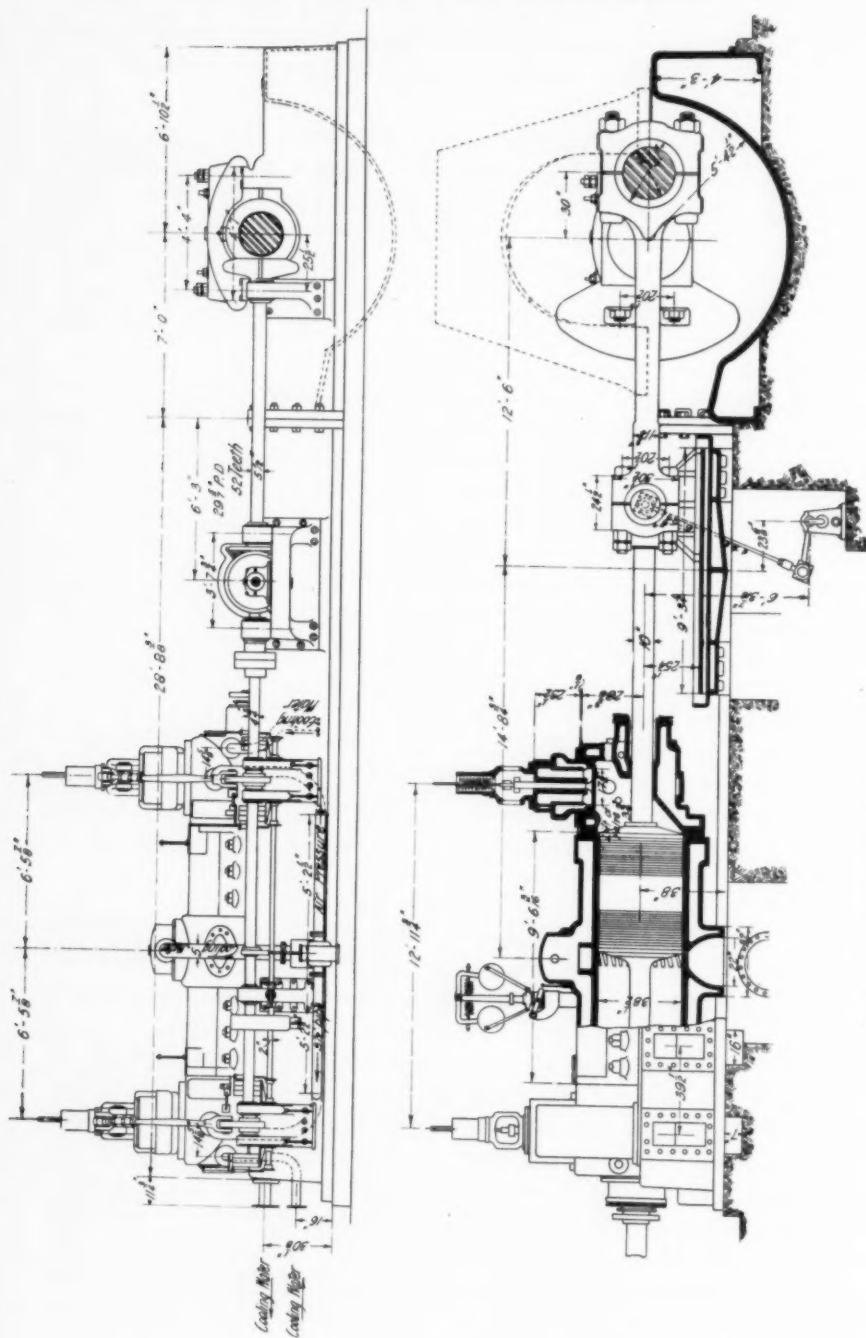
GENERAL ASSEMBLY ELEVATION OF 2000-H. P. ENGINES
